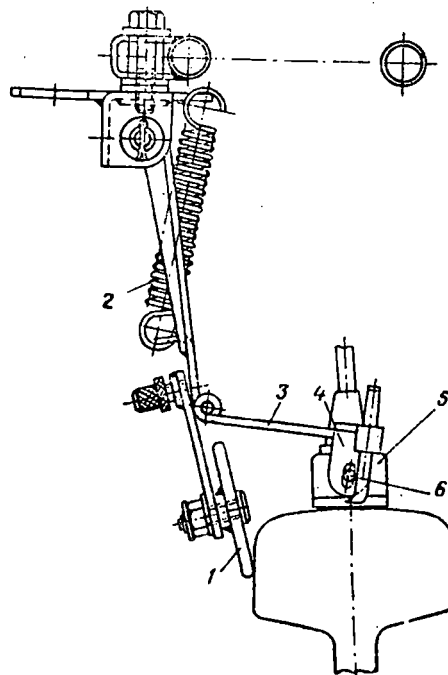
Mechanical device for centering the shoe on the running surface of the rail head.
